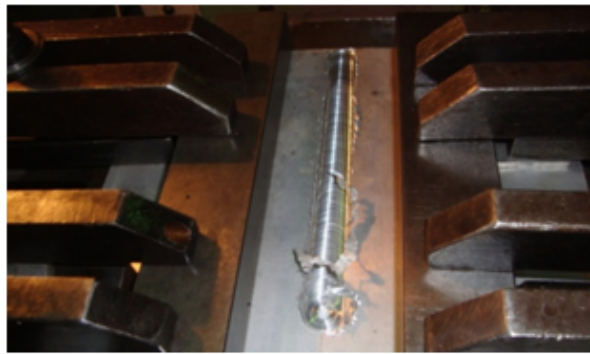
Friction stir weld formed from the initial trial
